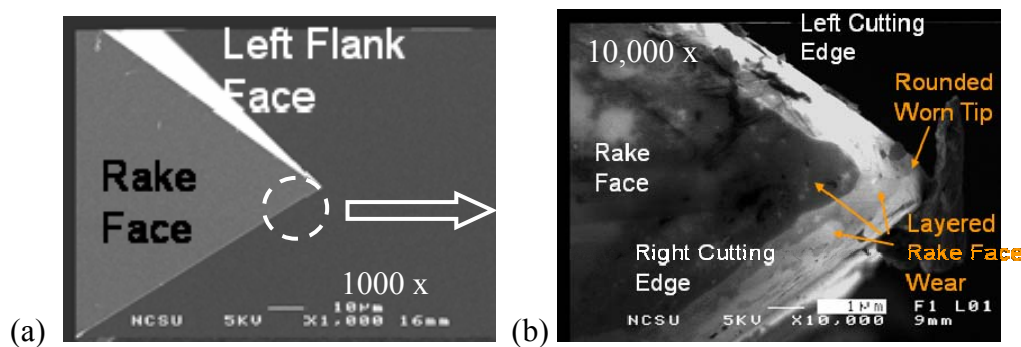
Wear on dead-sharp diamond tool after machining copper and stainless steel trihedrons. (a) Tool before machining (b) Worn tool showing rounding wear on cutting edges and tool tip, and wear back of the rake face from the tip. FESEM images by R. Garcia.
